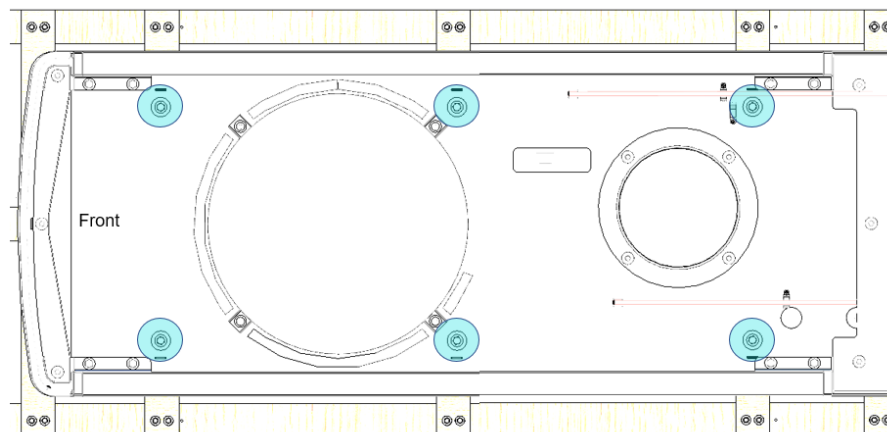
Locations of Lag Bolts to Remove Unit from Wood Pallet.
